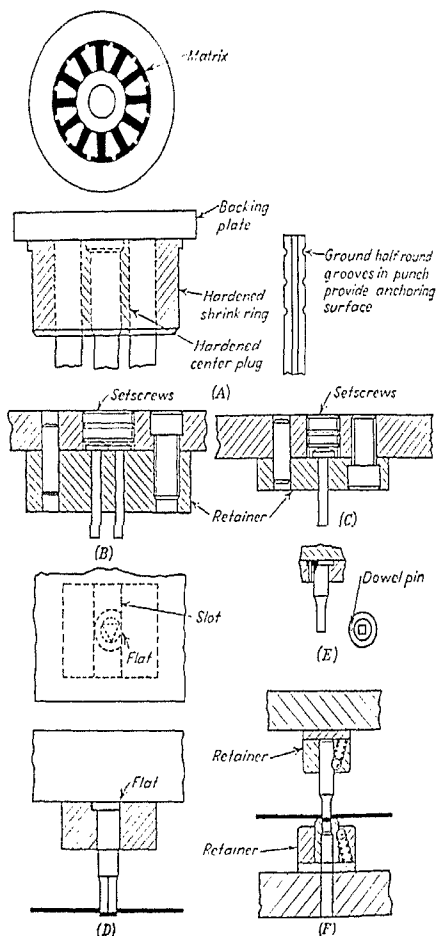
Methods of mounting and securing punches by the use of: (A) a shrink ring (Steeling Tool Co.); (B, C) set screws; (D) a flat shoulder; (E) dowel pin; (F) half-lock retainers.¹¹
